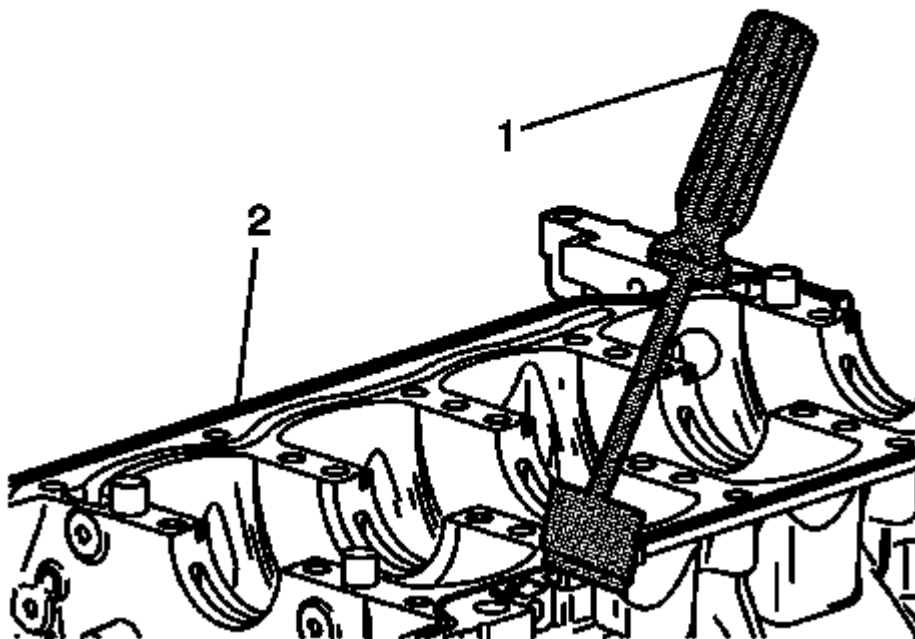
Clean Sealing Material From Gasket Mating Surfaces With A Suitable Tool
